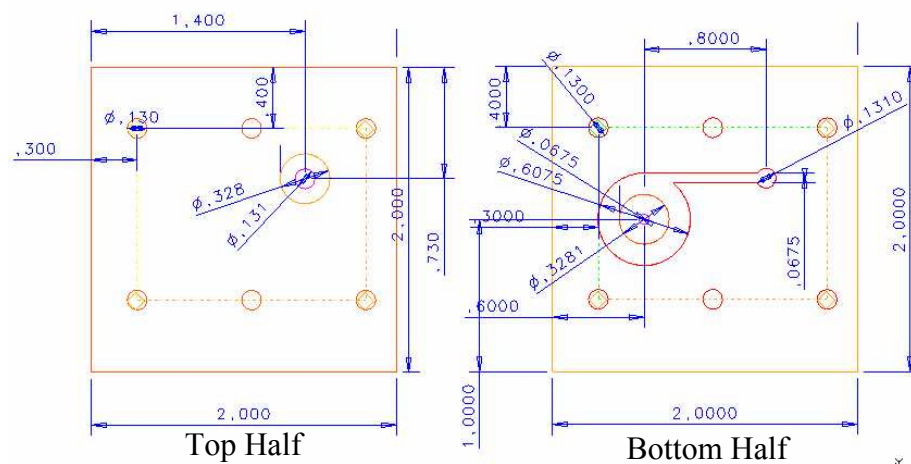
Dimensional Drawing of Fluid Diode (Dimensions in inches)
